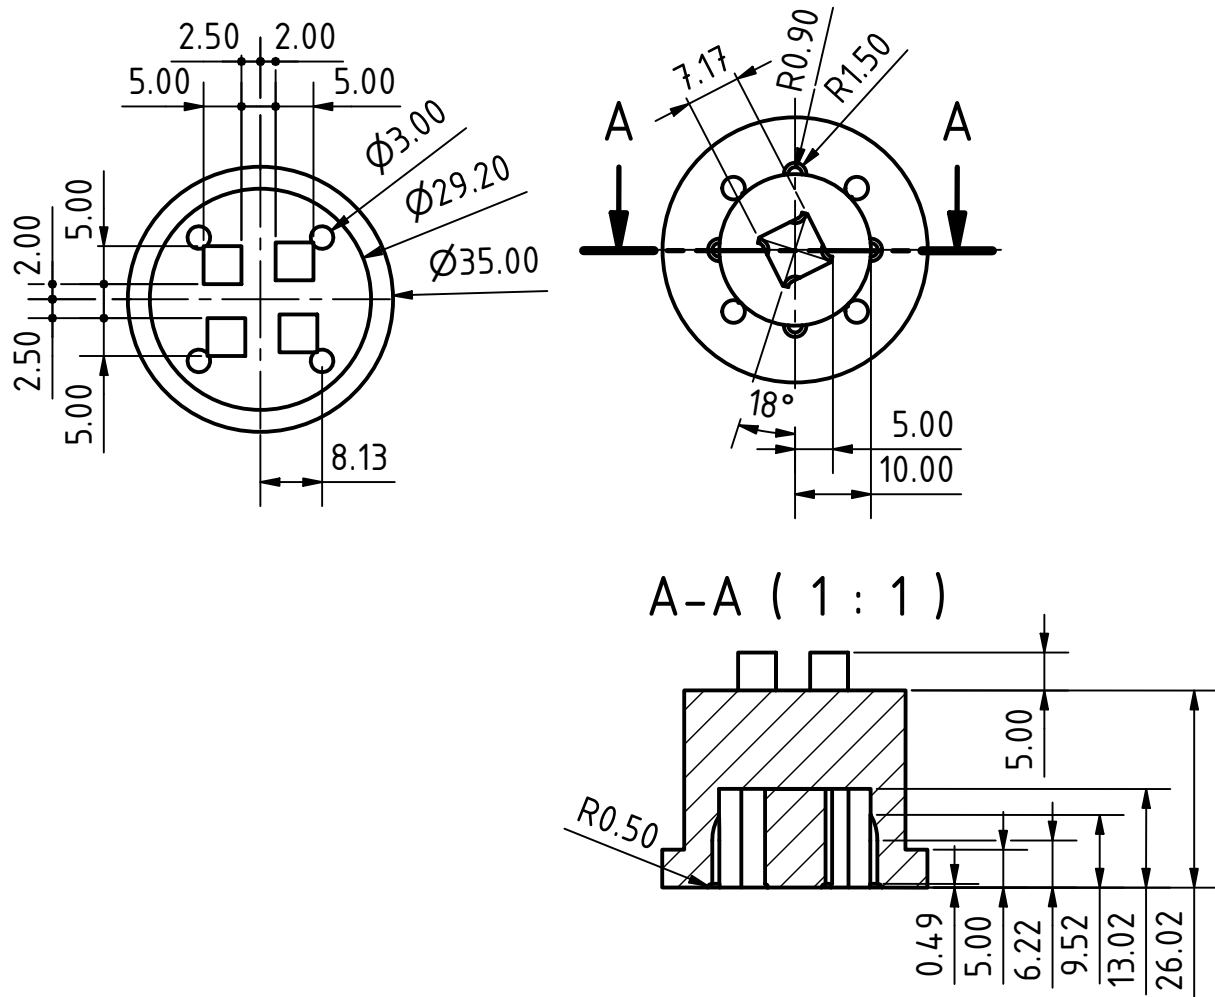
Technical drawing of the rotor (part 2) of the integrated valve system: top view (top left), bottom view (top right), and section view (bottom) with scale 1:1. All dimensions in mm.
